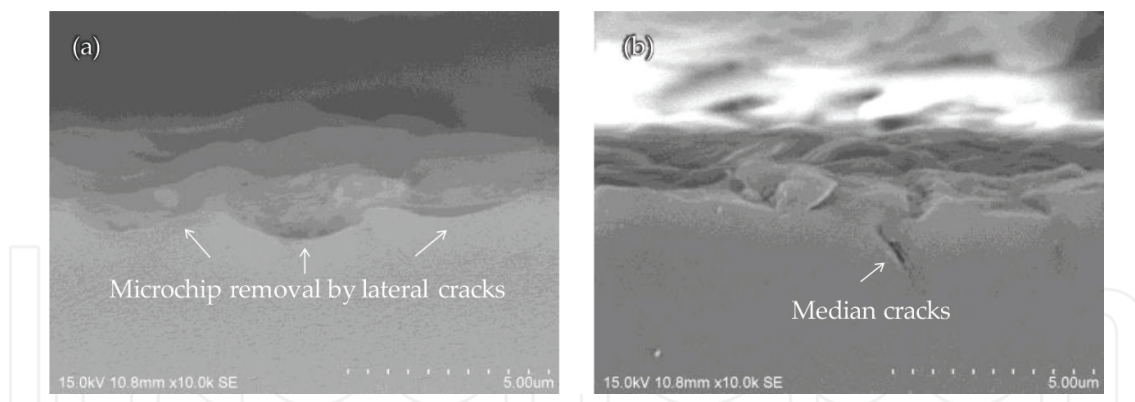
Cross sections of the machined surfaces: (a) microchip removal by lateral cracks, (b) example of median cracks.
